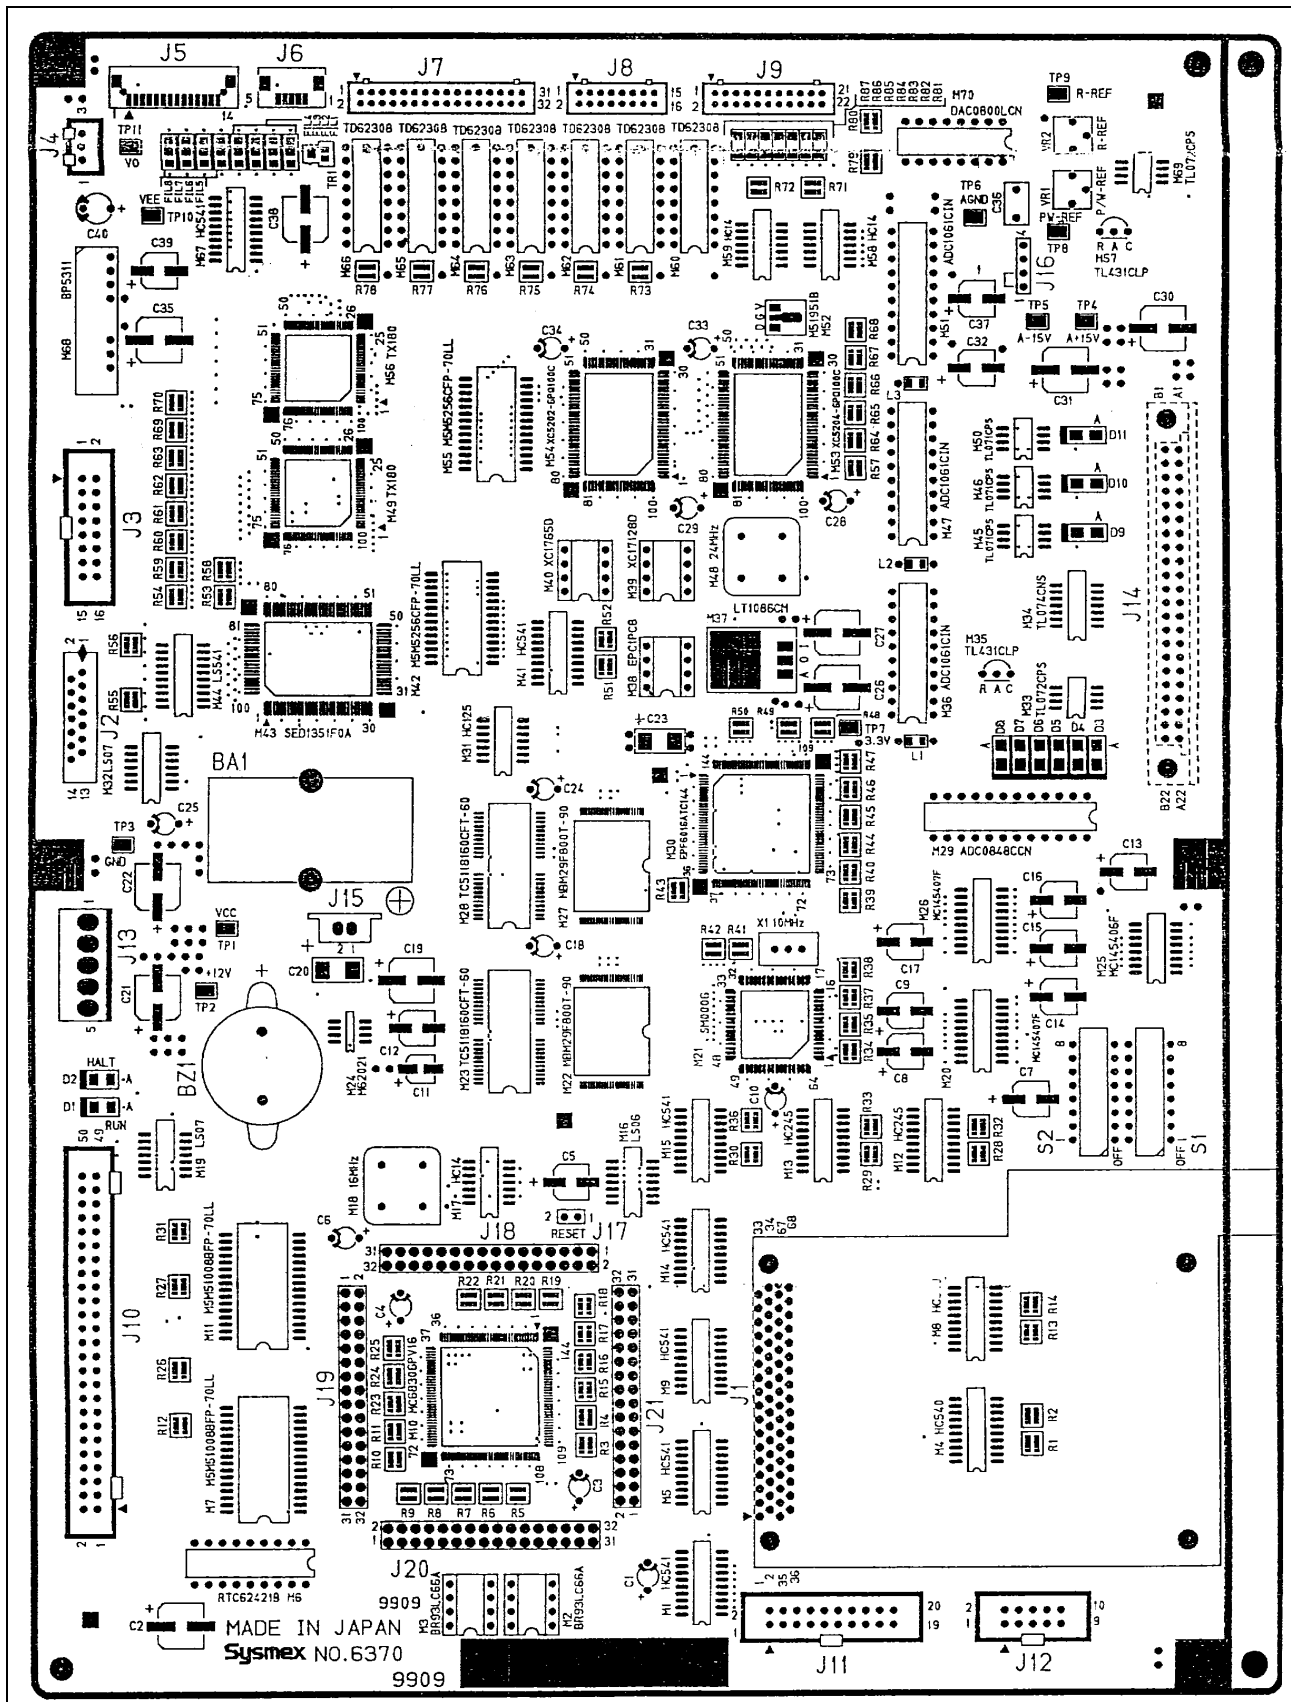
PCB No. 6370 Assembly Drawing (KX-21N) [3]
